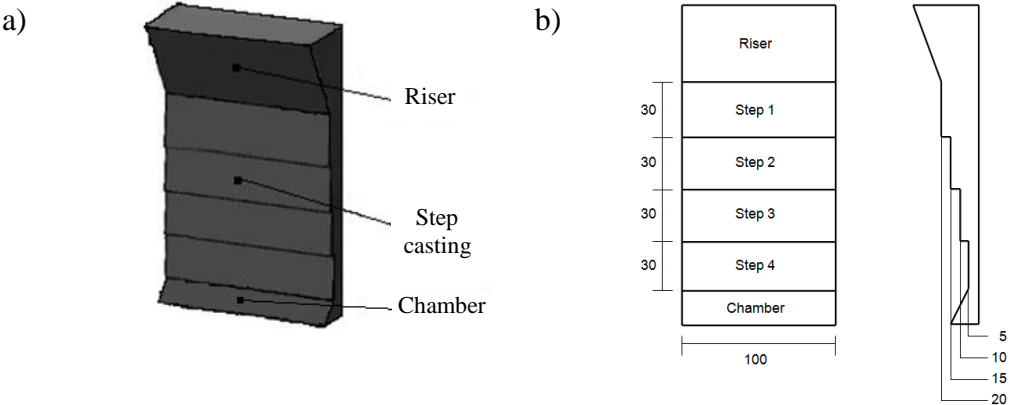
(a) The step casting CAD geometry with (b) front and side views. All the measures are in mm.
